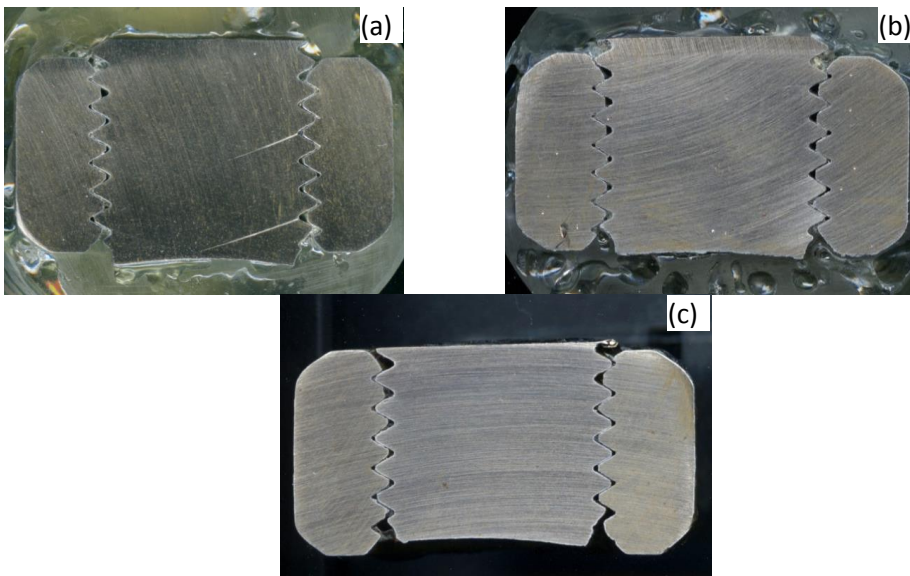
Transverse sections (a) A, (b) B, and (c) C, used to measure real thread geometries of three bolt assemblies from the batch
